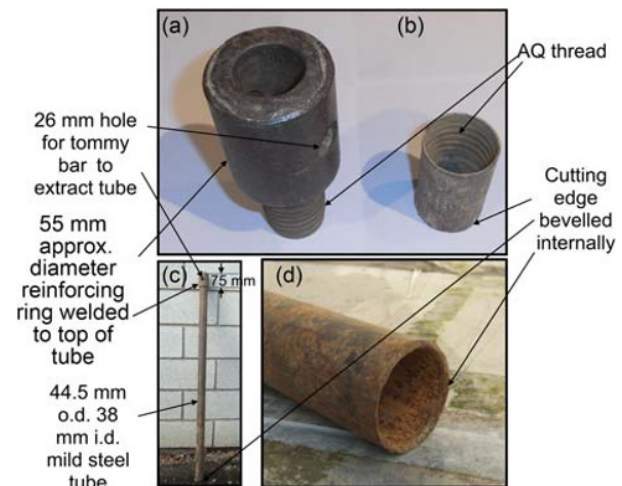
(a) and (b) AQ drill rod ends for access tube installation made from a length of drill rod. Photographs by Andy Dixon. Reproduced with permission. (a) Head piece to allow driving into the soil. (b) Cutting edge. (c) Fixed length guide tube (d) Cutting edge of fixed length guide tube; this one has been damaged by contact with stones in the soil and needs sharpening.
